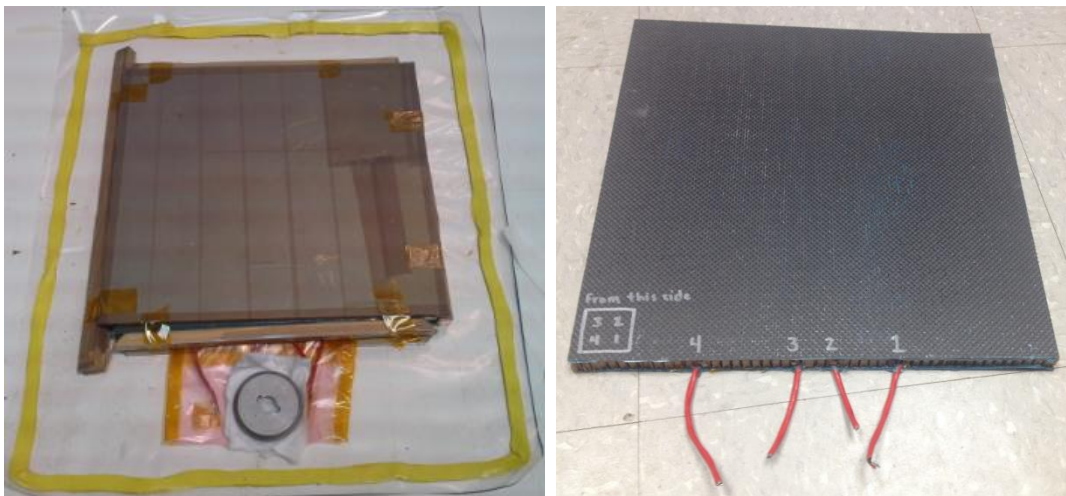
Vacuum bagged and completed sandwich panel with integrated actuators.
